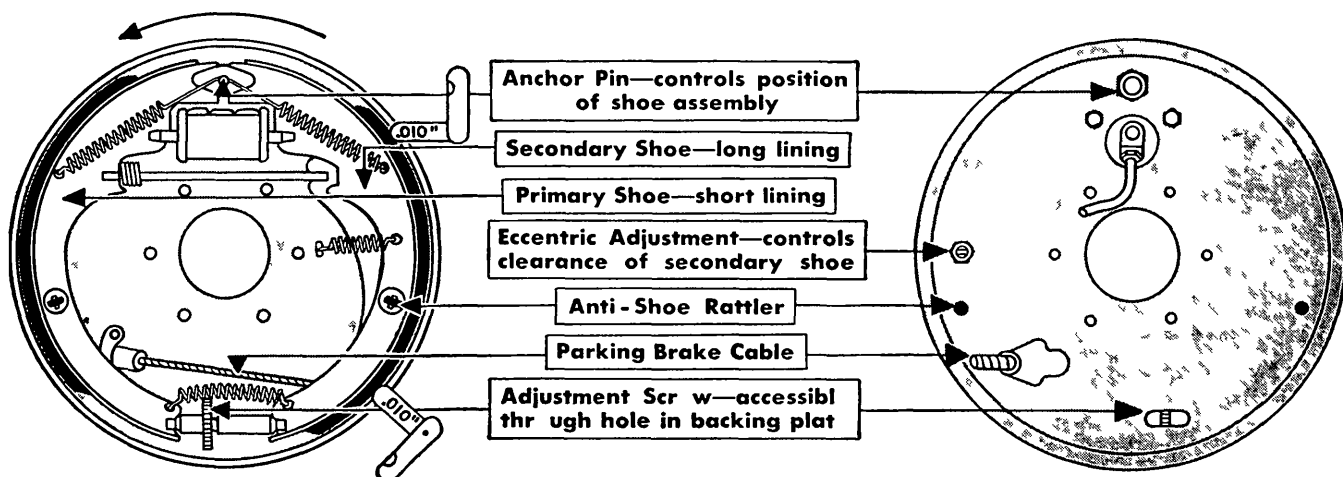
Bendix hydraulic single anchor brake with an eccentric adjustment for secondary shoe. Diagram shows left rear brake; front brake identical except for absence of parking brake
